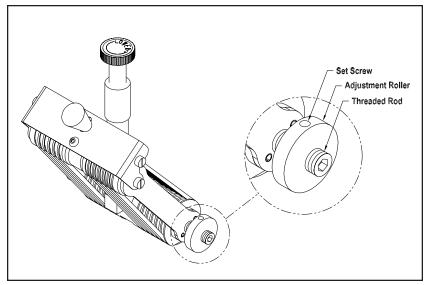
Horizon Adjustment Mechanism (shown on Advancing O-Ring Gate)
